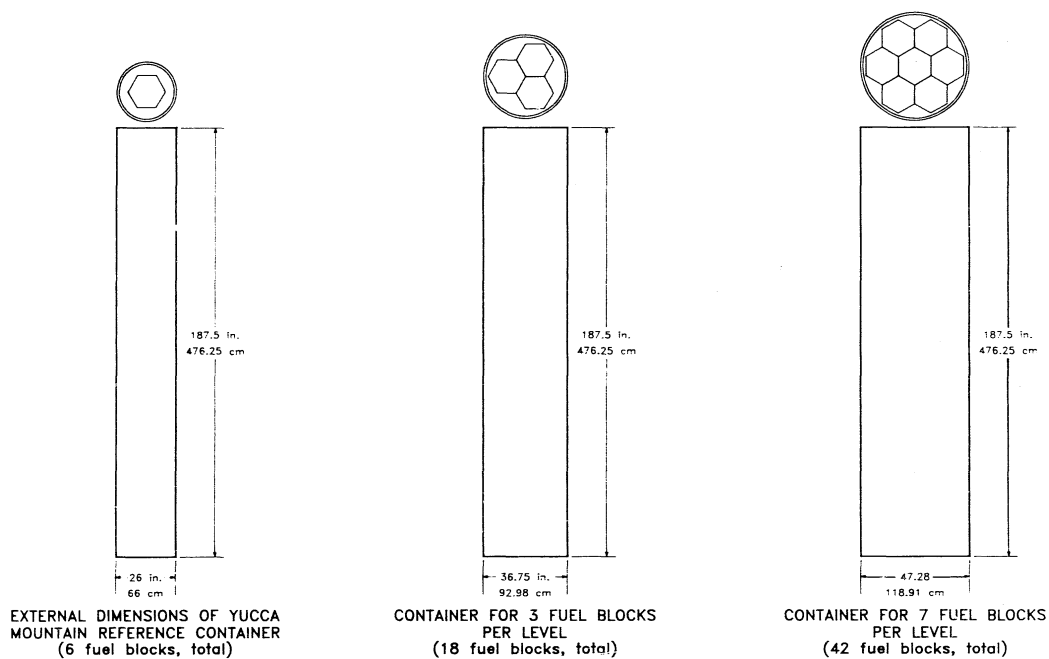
HTGR spent fuel package dimensions and layouts (from [74]).
